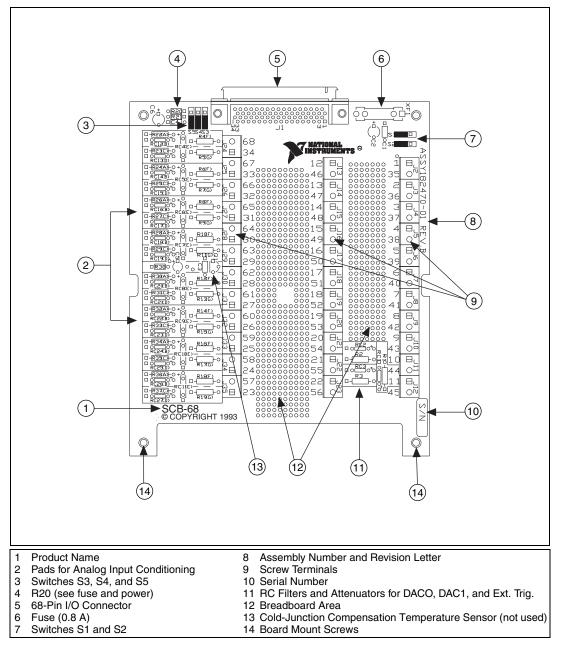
IMAQ SCB-68 Terminal Block Parts Locator Diagram
